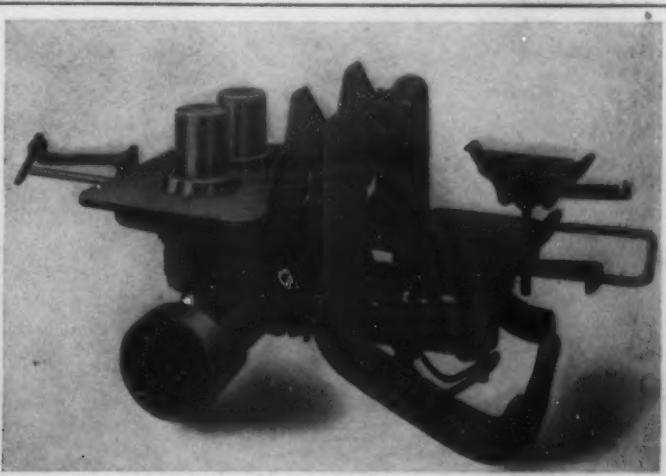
View Showing Jarring Section and Knock-Out Arm
